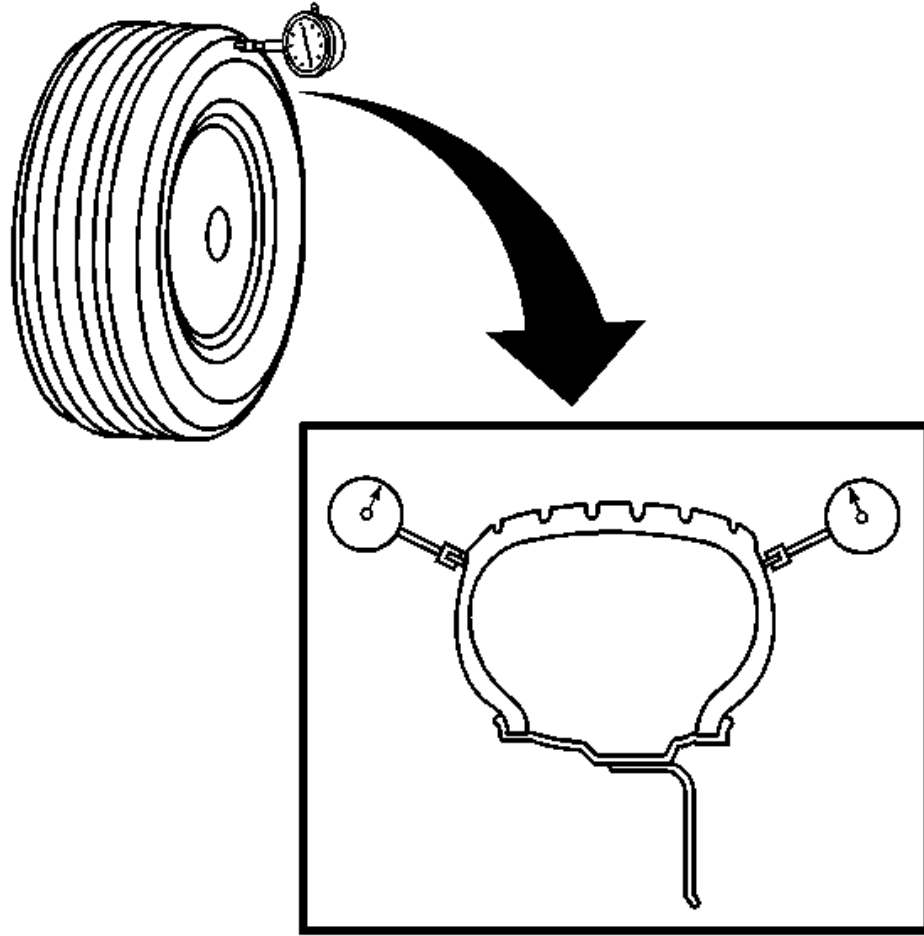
Measuring Tire & Wheel Assembly Lateral Runout
